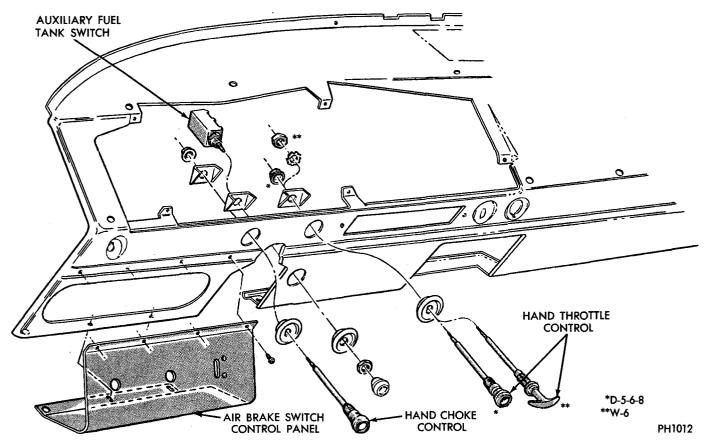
Switches Extra Equipment D500-600-700-800-W600
